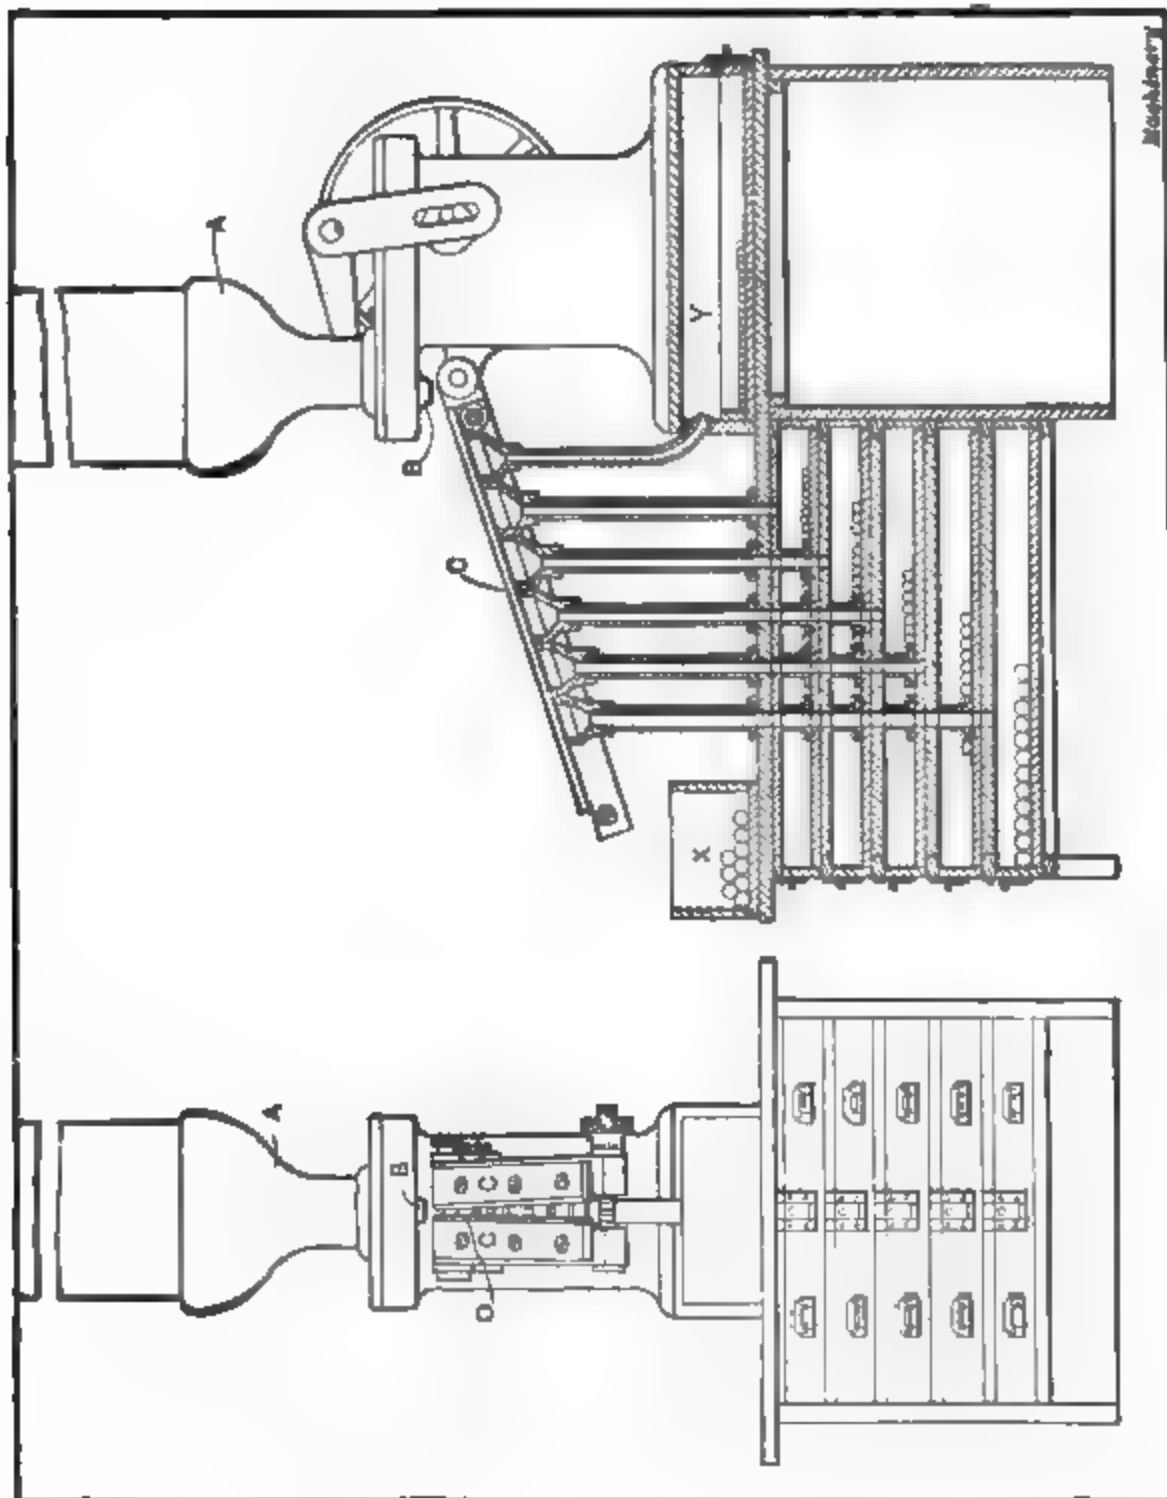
The Grant Ball Measuring Machine—U. S. Patent No. 839,456
